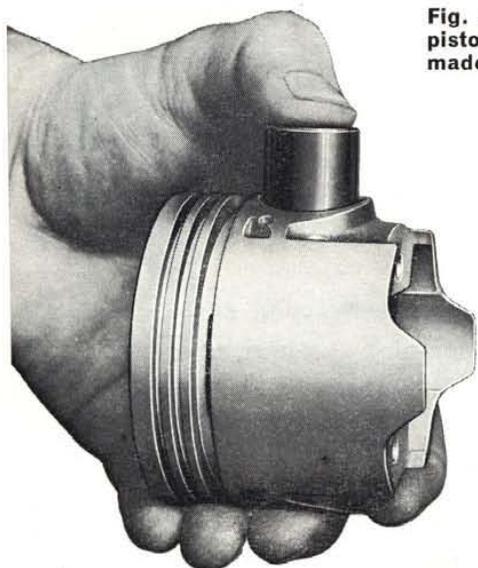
Insertion of piston pin should be made by sheer thumb pressure.
